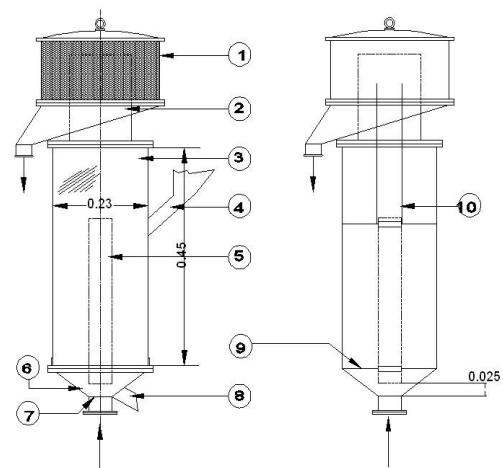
Draft tube assisted Spouted Bed Roaster chamber detail
